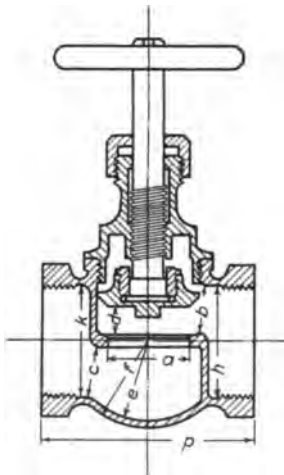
Section Through 2-inch Scott Globe Valves Tested. Dimensions Given in Table 2, Page 26.
